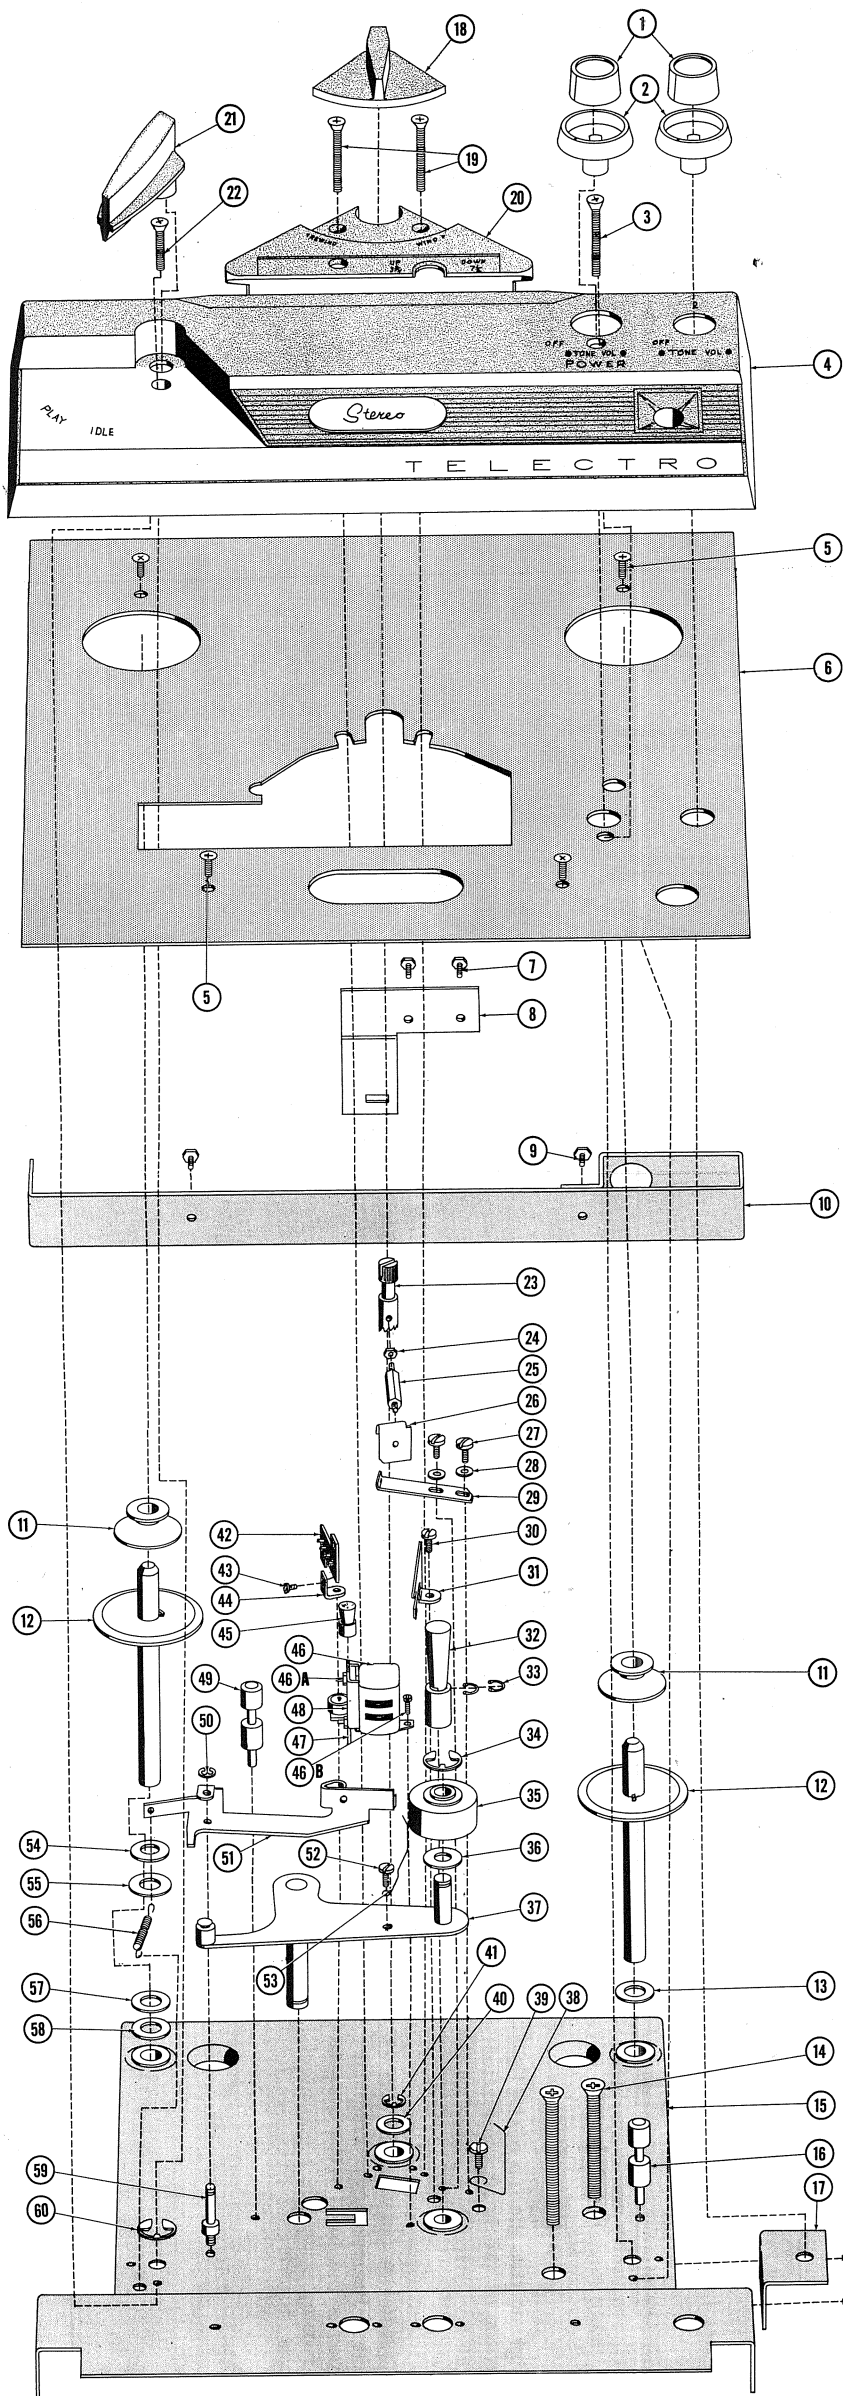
A EXPLODED VIEW OF PARTS ABOVE BASEPLATE
